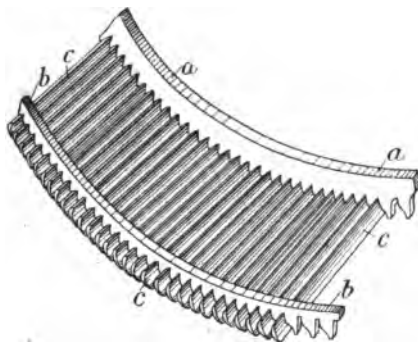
Blades and Shrouds of a Parsons Radial-flow Steam Turbine.
